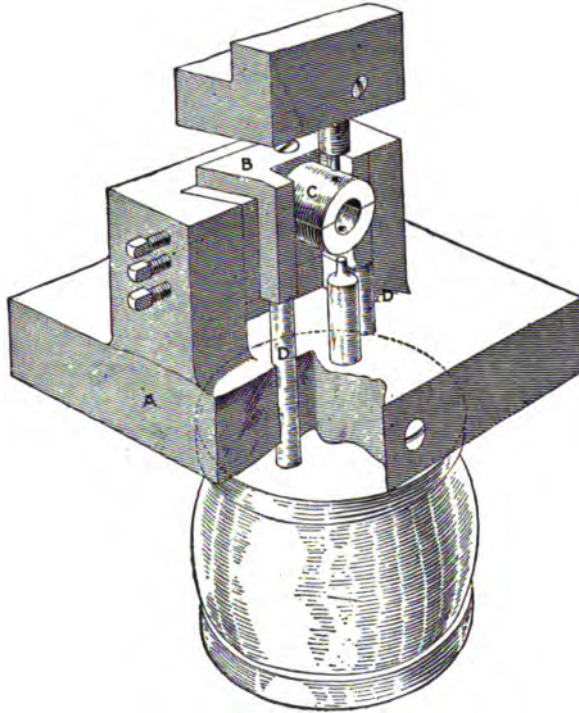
TOOLS FOR PIERCING A THIN SHEET METAL SHELL
